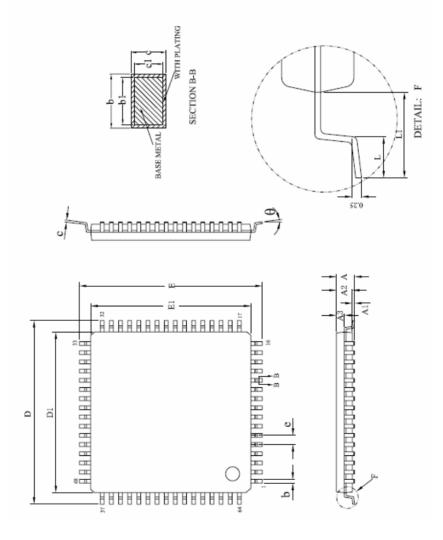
LQFP64-10x10mm Package Dimension Parameter
